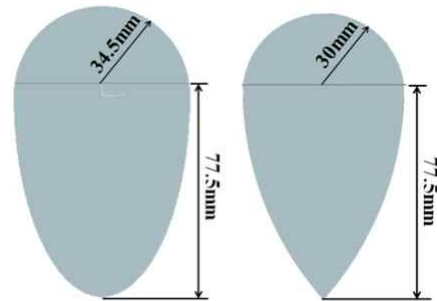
Geometry of extrusion die (bottom half) for butyl rubber sheet.
